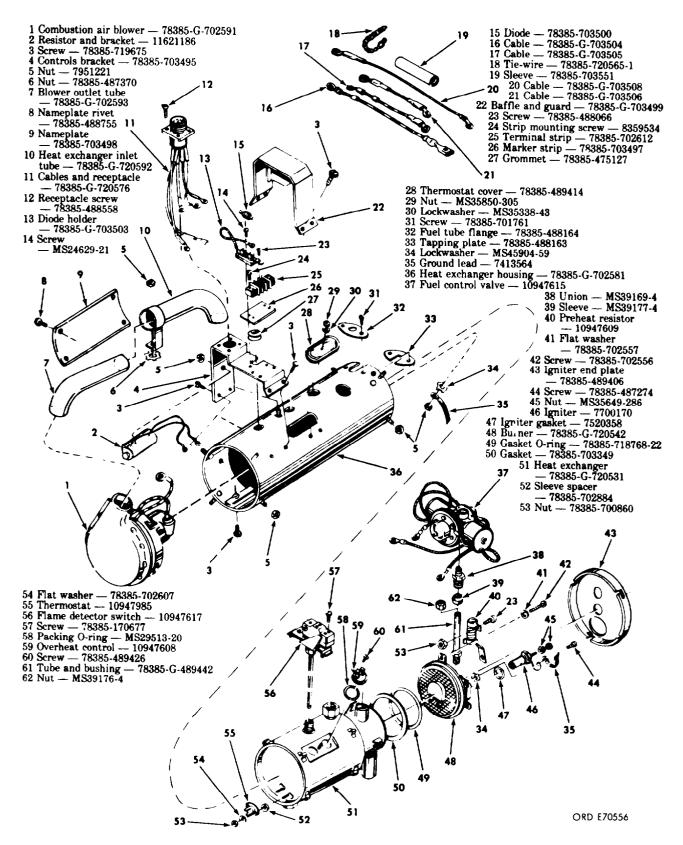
Disassembly/assembly of winterization hit coolant heater-11601698.
